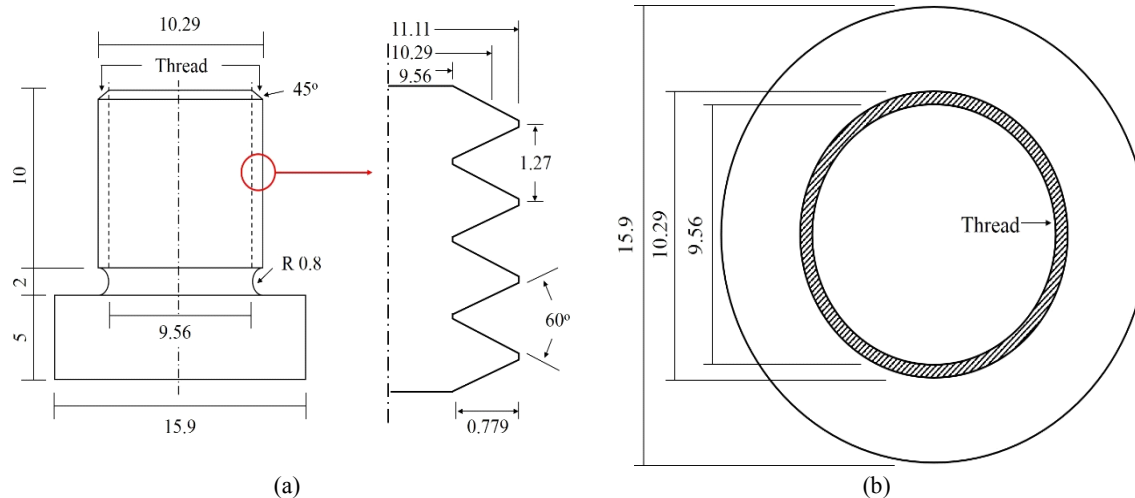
Dimension of Test specimen; (a) Specimen and screw thread, (b) Overview.
